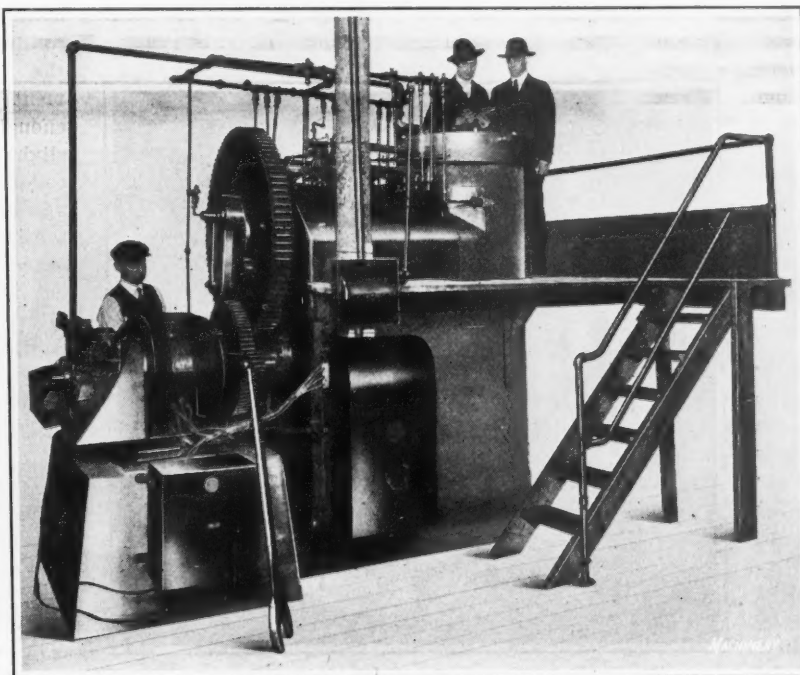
Multiple-tool Gear Shaper built by the Stevenson Gear Co.
